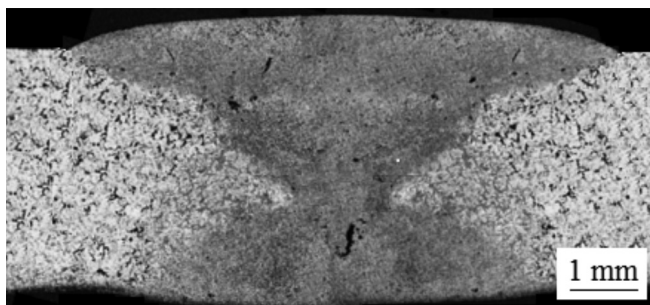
The macrostructure of joint welded by 141 method
